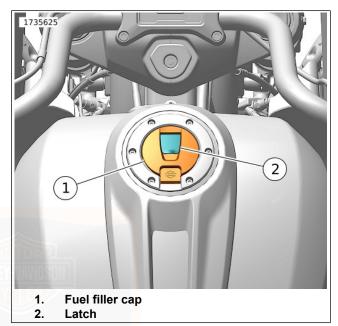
Installing/Removing Fuel Filler Cap: Flush Mount
